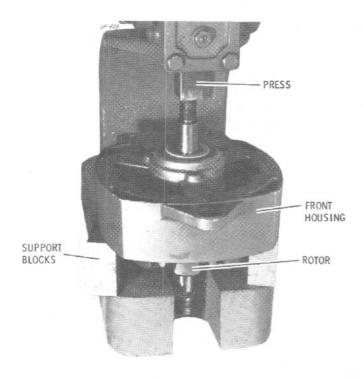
ROTOR SEPARATION FROM FRONT HOUSING
